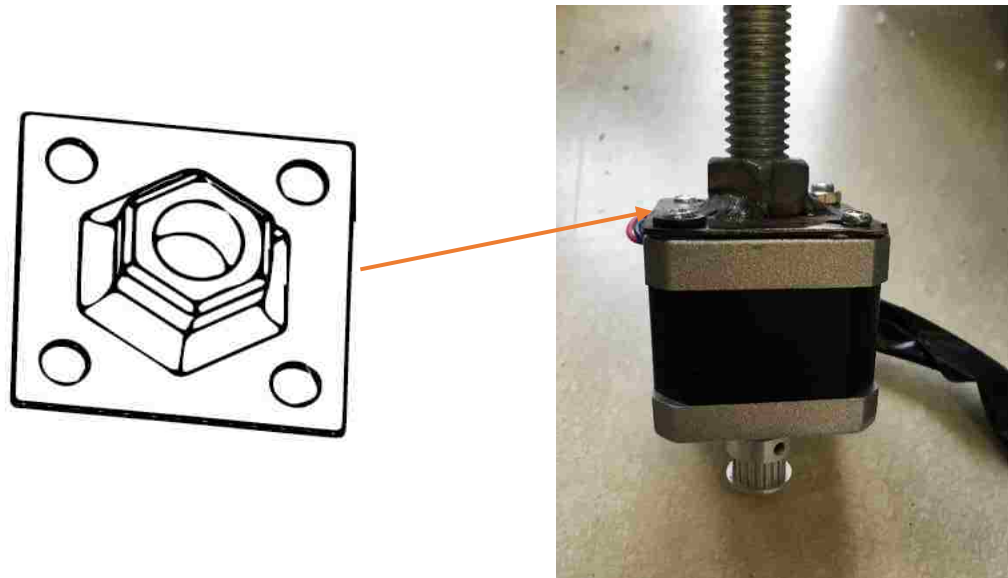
Motor mount plate that was customized to hold the electric motor responsible of rotating the nozzle.
